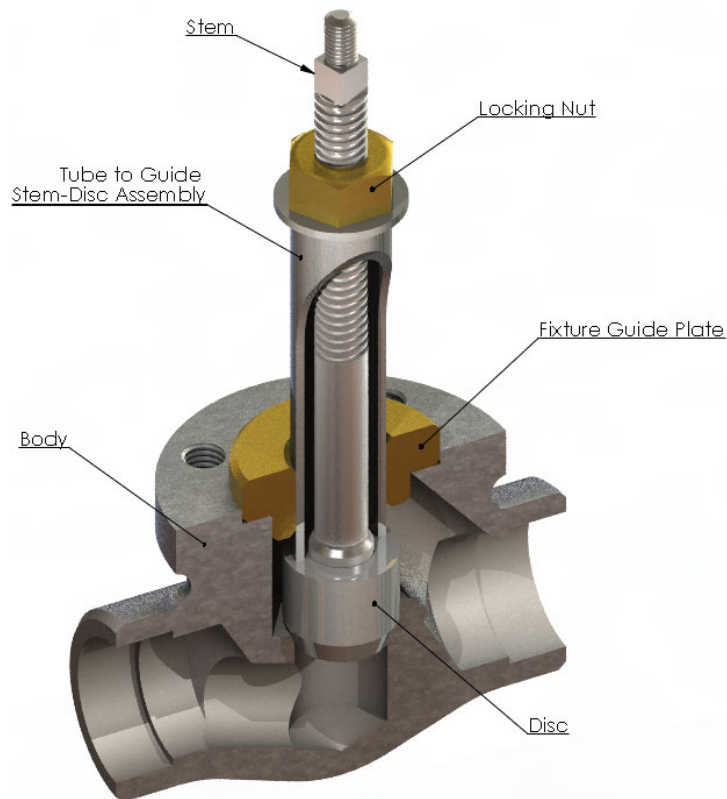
Fixture for Globe & Piston/Ball Check Valve Seat Surface Repair
